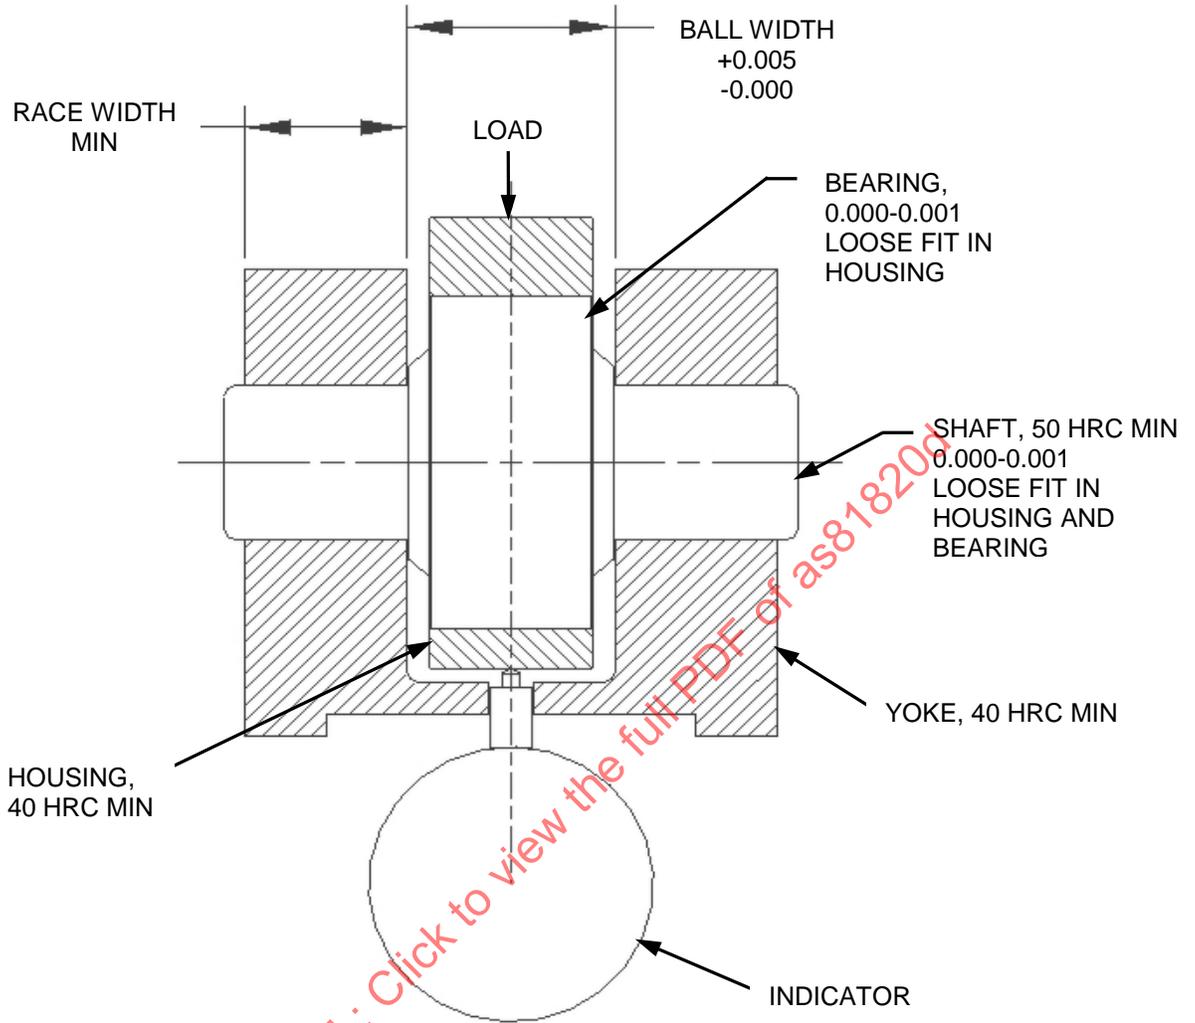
RADIAL STATIC LIMIT LOAD TEST FIXTURE
